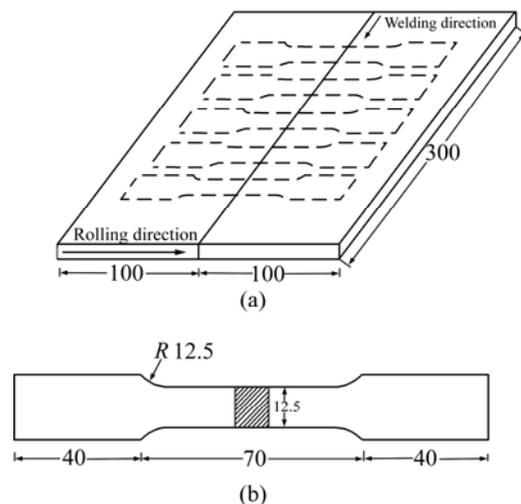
Scheme of welding with respect to rolling direction and extraction of tensile specimens (a) and dimensions of flat tensile specimen (b) (unit: mm)
